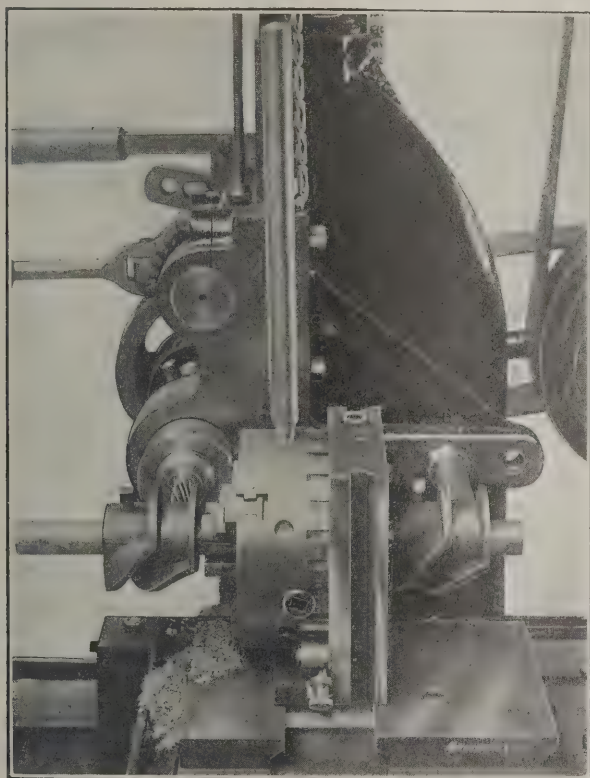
Cam Cutting with Master Cam and Follower Roll.
